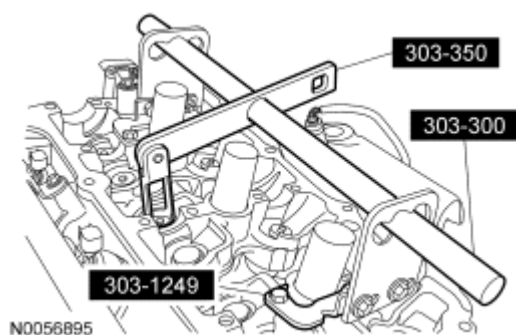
Removing Keys, Retainer & Spring Using Special Tools (303-1249, 303-350, 303-300)
